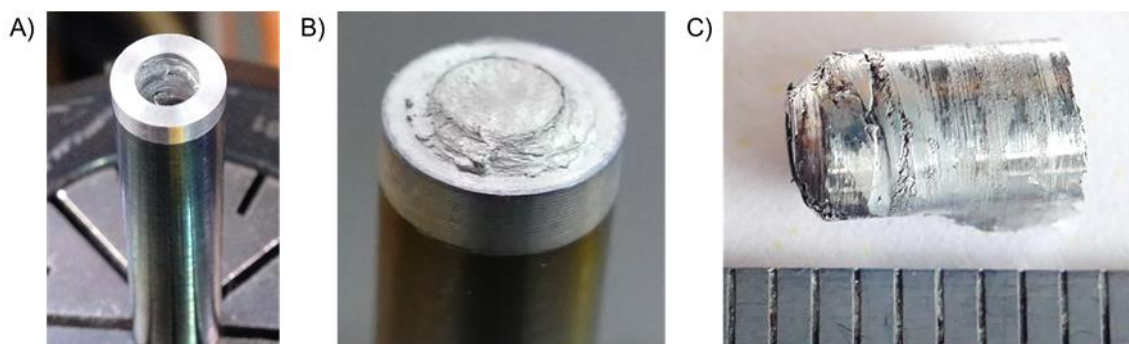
Tool clogging stages: A) base material accumulation on the inside surface of tool specimen, B) fully clogged tool with a C) slug of material.
